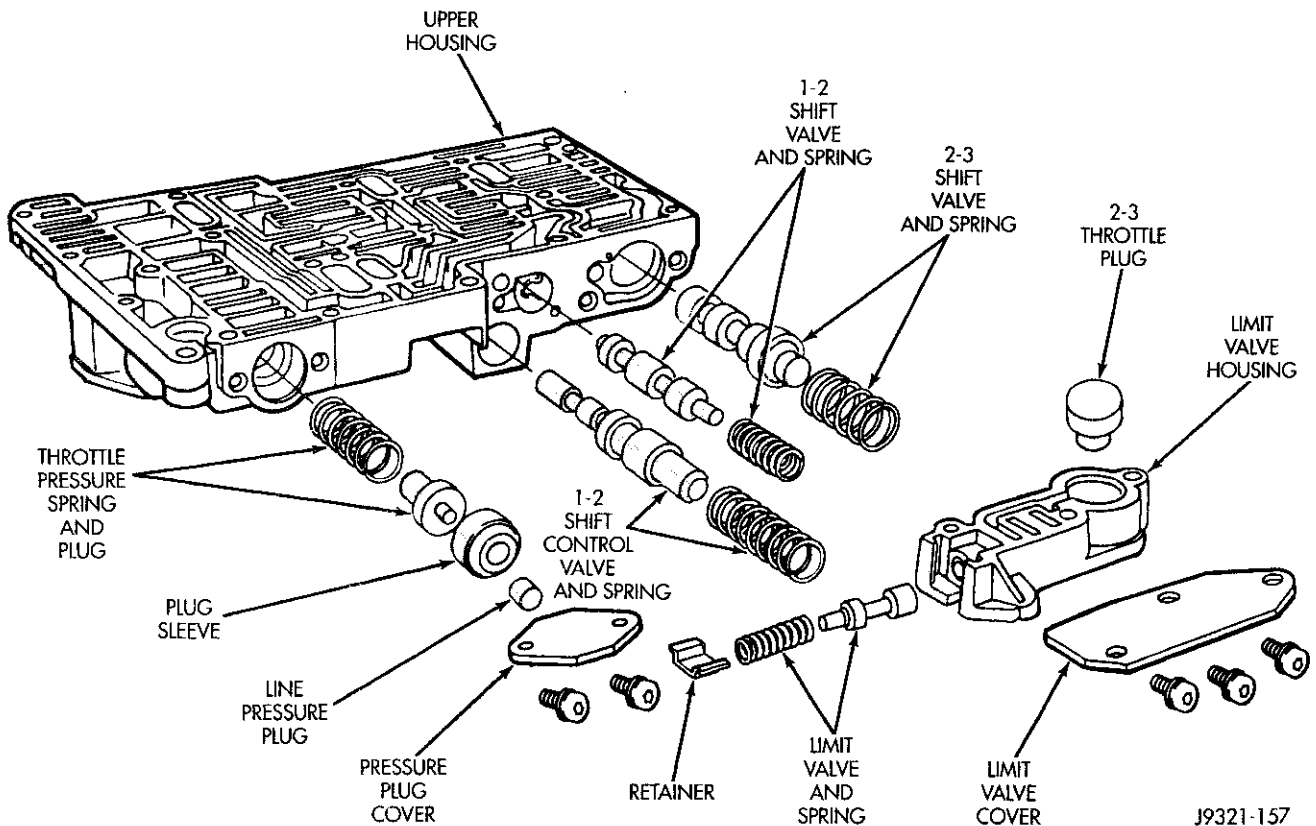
Upper Housing Shift Valve And Pressure Plug Locations
